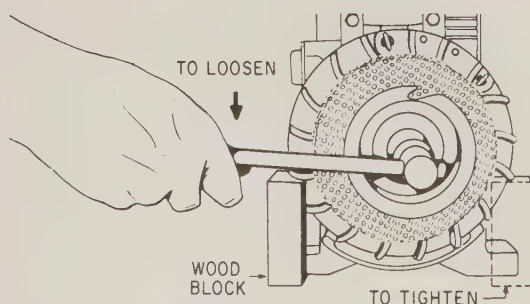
The nuts on larger flywheels can be loosened by holding the flywheel with a block of wood, as shown. (Briggs & Stratton Corporation)
